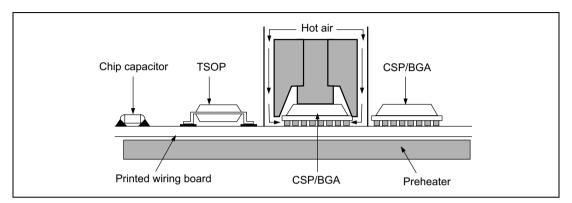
Soldering Area Reworking Method for CSP and BGA Packages
